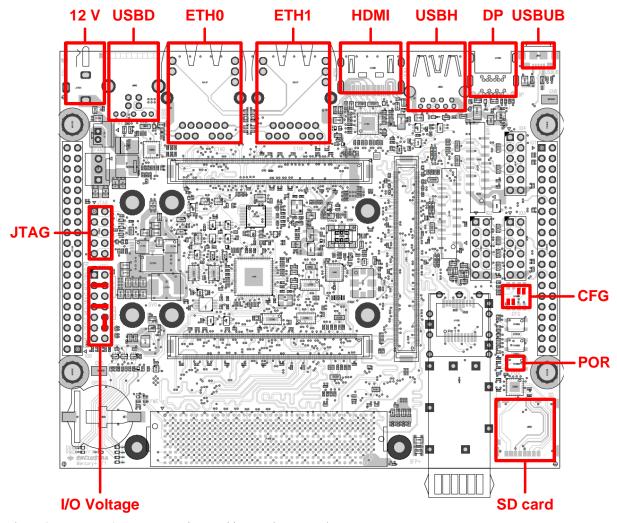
Mercury+ ST1 Base Board Assembly Drawing (Top View)
